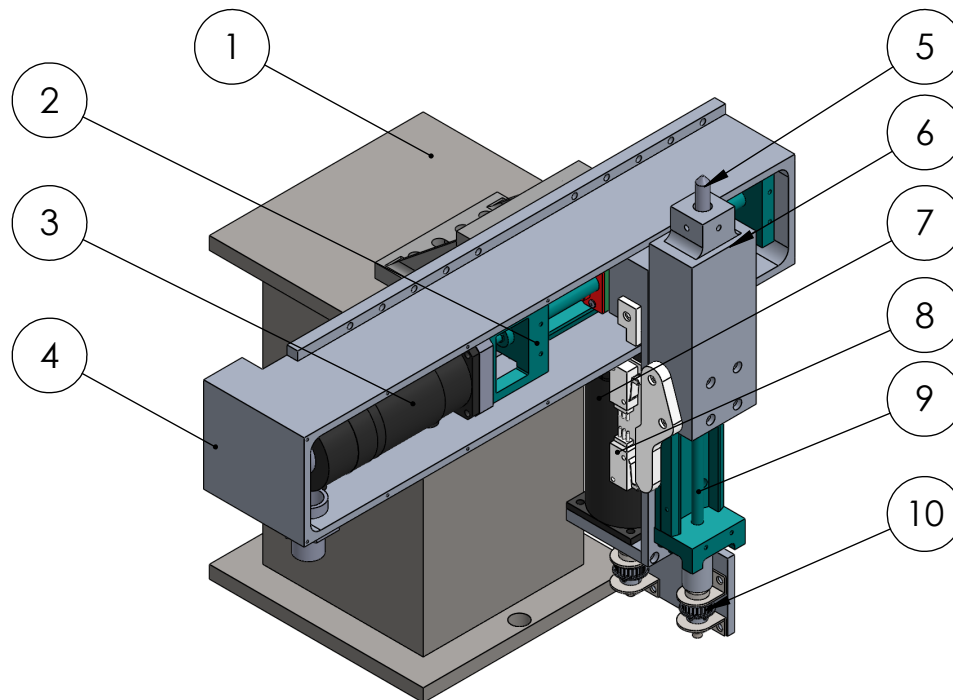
CAD model of the grooving device with colour-coded components. (1) Structural tower; (2) Horizontal stage; (3) DC Servomotor; (4) Horizontal stage enclosure; (5) Single-point diamond dressing tool; (6) Dressing tool holder; (7) Limit switches and cam; (8) DC Servomotor; (9) Vertical stage; (10) Belt and pulley system (belt not shown).
